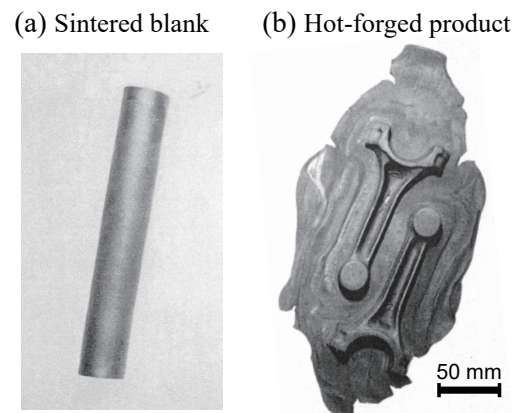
Connecting rod formed by one-heat-forging at 1200°C using sintered 20 vol% TiB/Ti-7Mo-4.5Fe-1.5Al-1.5V β -Ti MMC.
